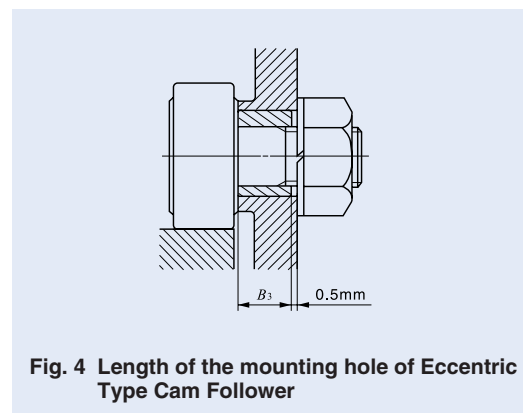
Length of the mounting hole of Eccentric Type Cam Follower
